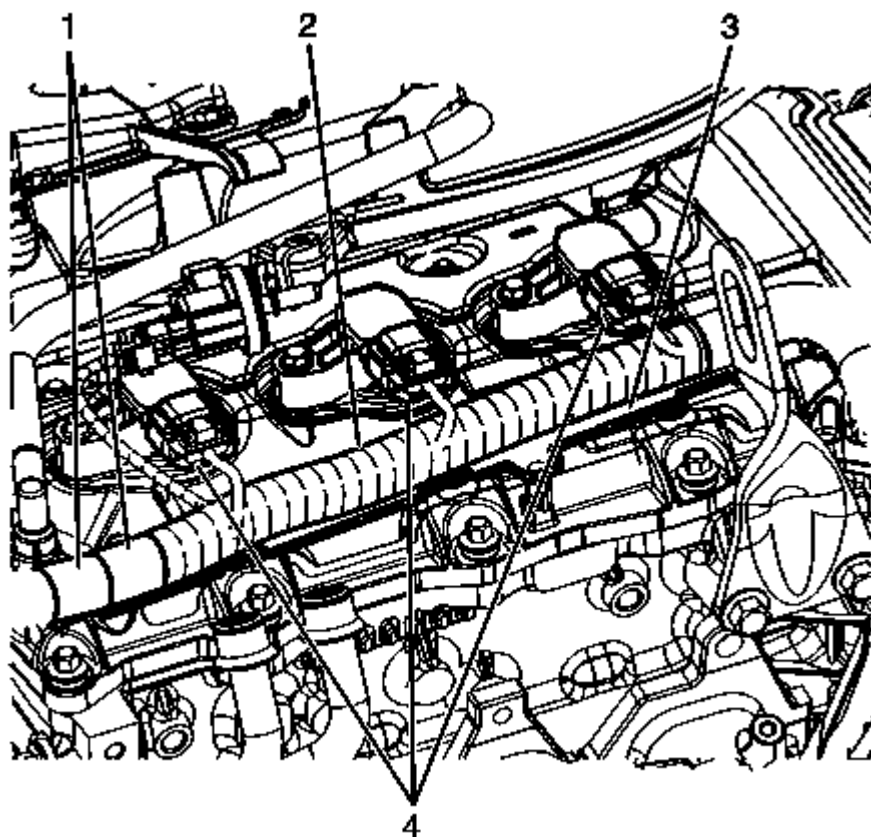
Ignition Coil Electrical Connectors & Wiring Harness
